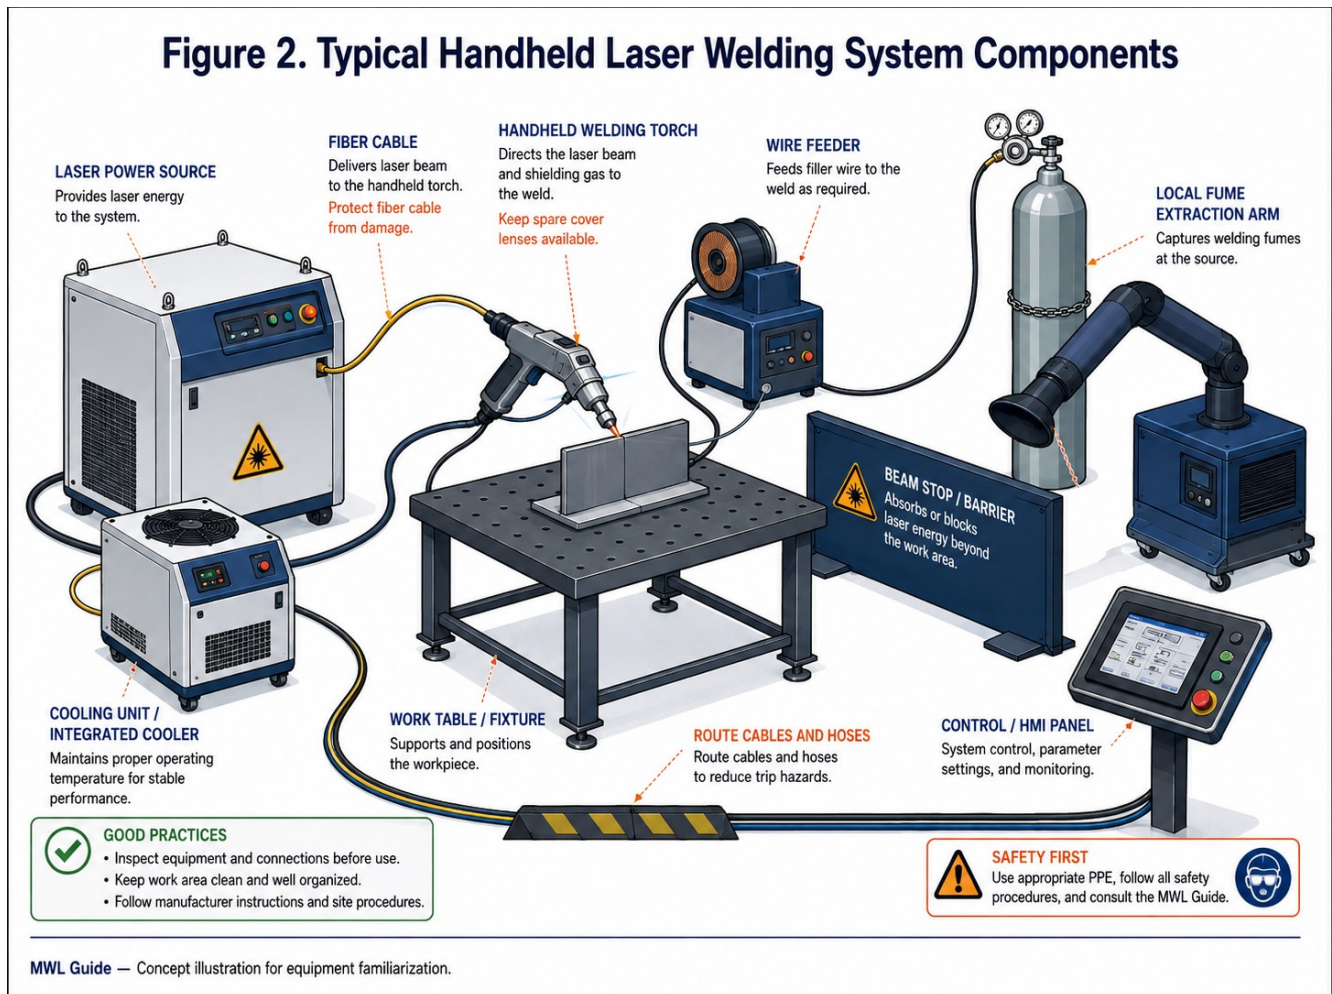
Typical handheld laser welding system components - original MWL concept illustration.
